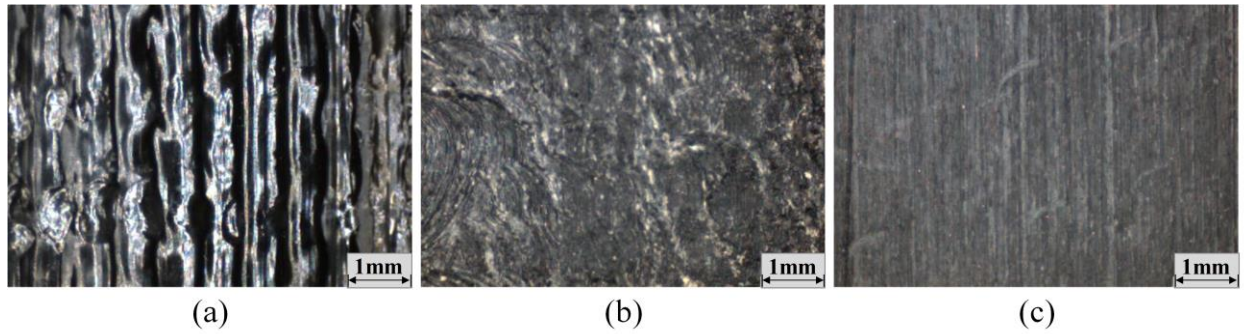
Surface profile of (a) printed surface, (b) machined surface of a printed part, and (c) surface of extruded plastic bars
